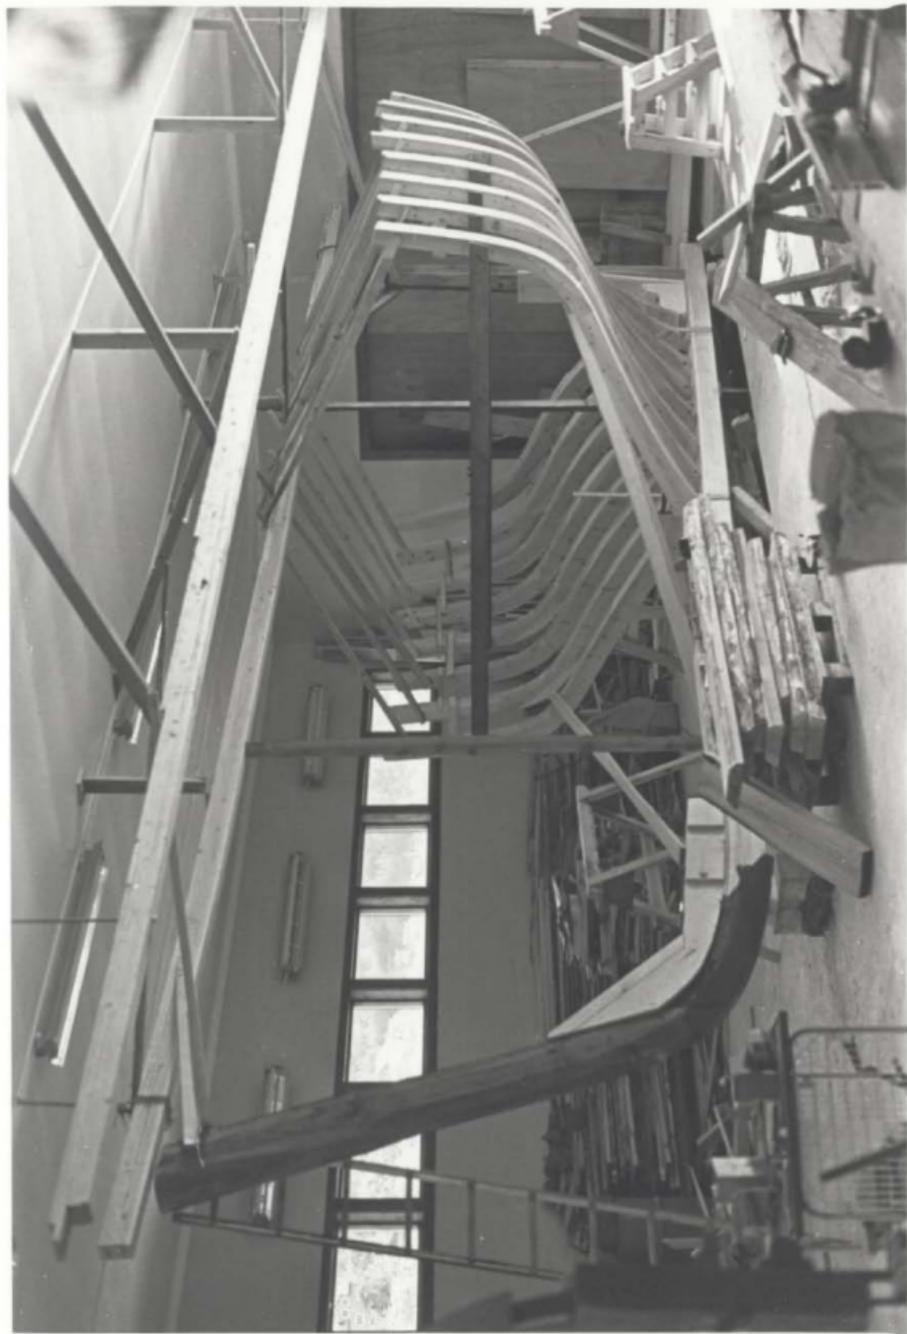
30 ft. kryssar under construction by Sverre Haugen
